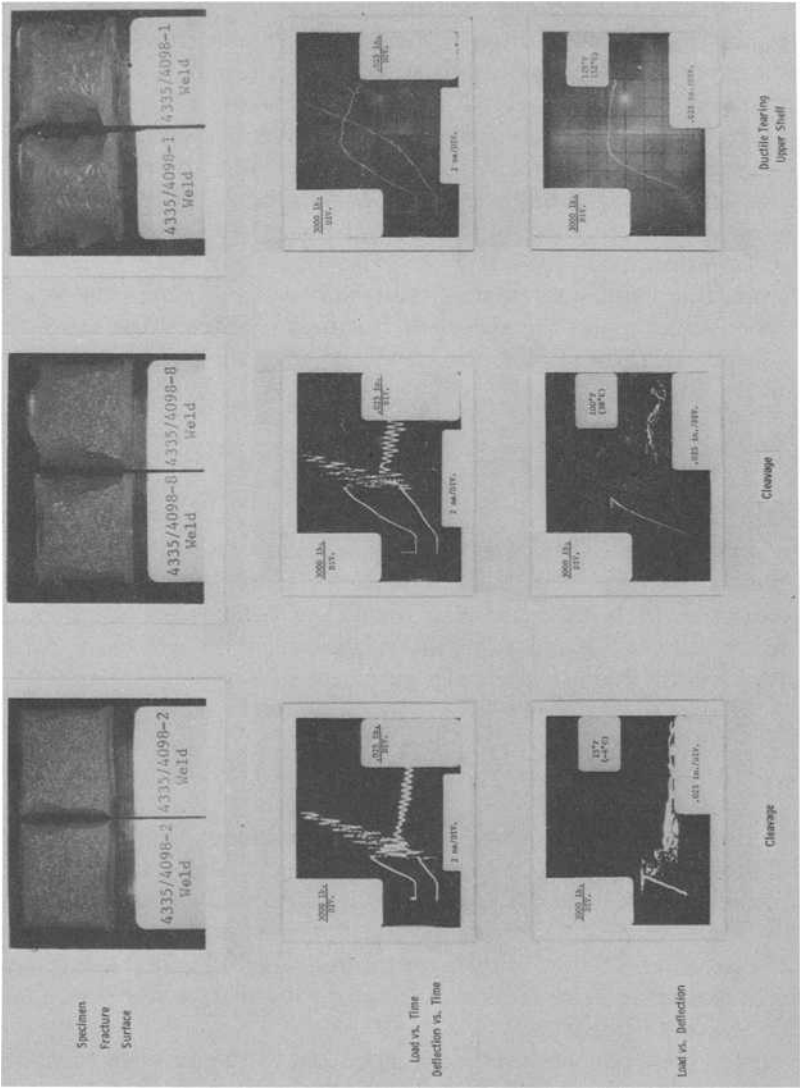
Test records for SA533 Gr A Cl 2 weld metal (4335/4098) specimens illustrating various types of failures.
